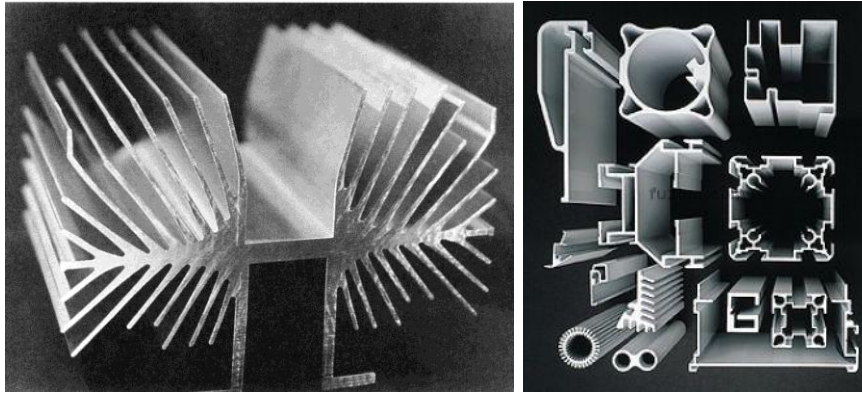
Typical examples of complex aluminum extrusions [15].
